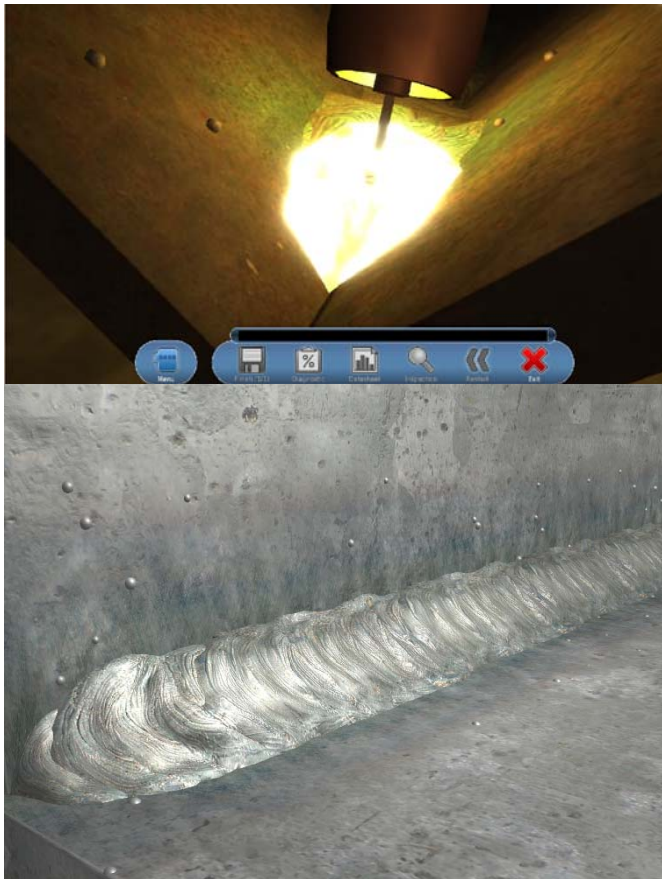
A virtual reality simulation of gas metal arc welding a fillet weld (GMAW). Source: 123 Certification
